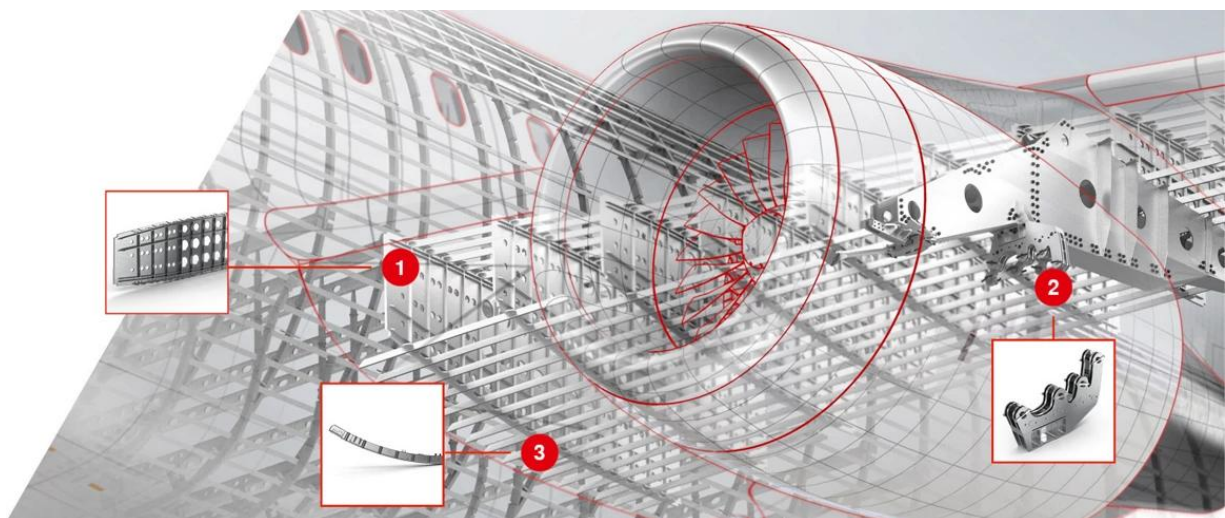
Aircraft structural components: 1- Wing rib; 2- Engine mount; 3- Frame.
